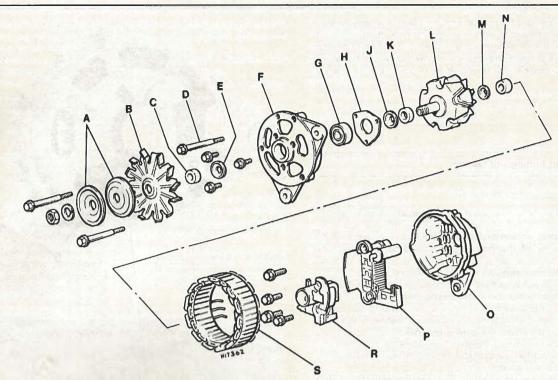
Exploded view of Mitsubishi type alternator (Sec 10)
